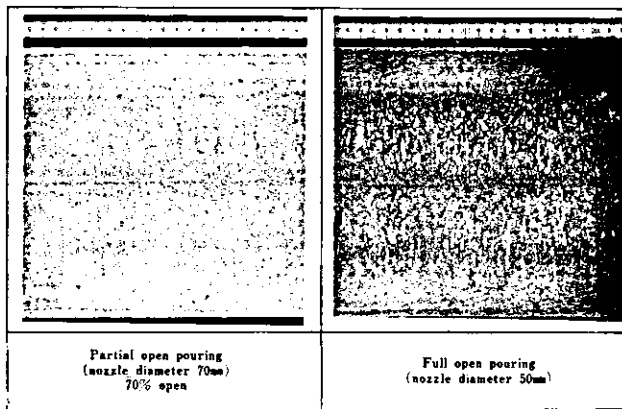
Macro-structure of the slab (full open cast and partial open cast).
